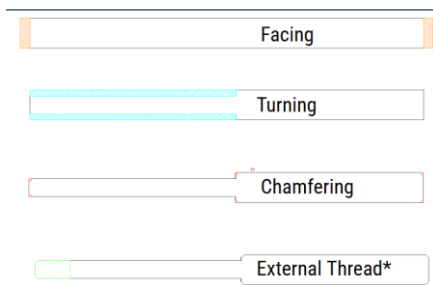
Breakdown of the machining operations conducted on the hammer handle workpiece.
